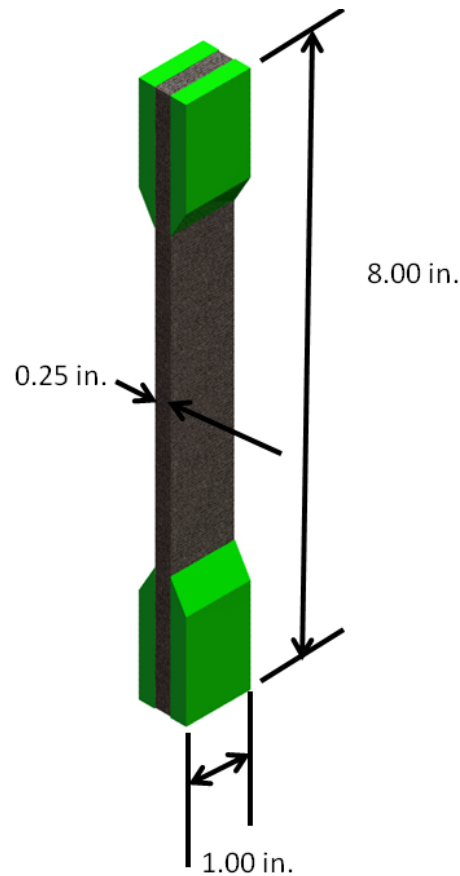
Tensile samples prepared and tested per ASTM D3039²²
